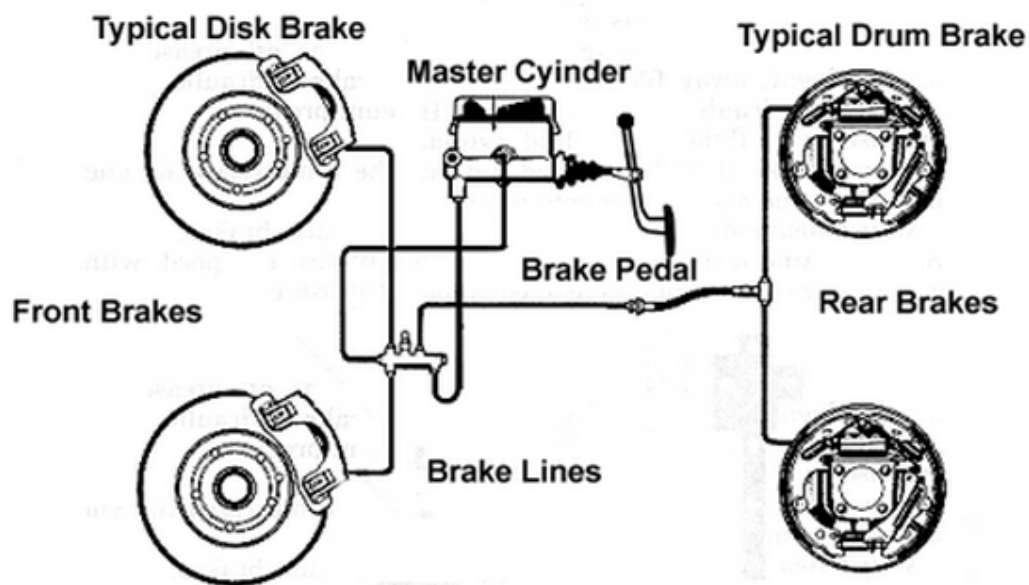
Typical automotive braking system with front disc brakes and rear drum brakes.
